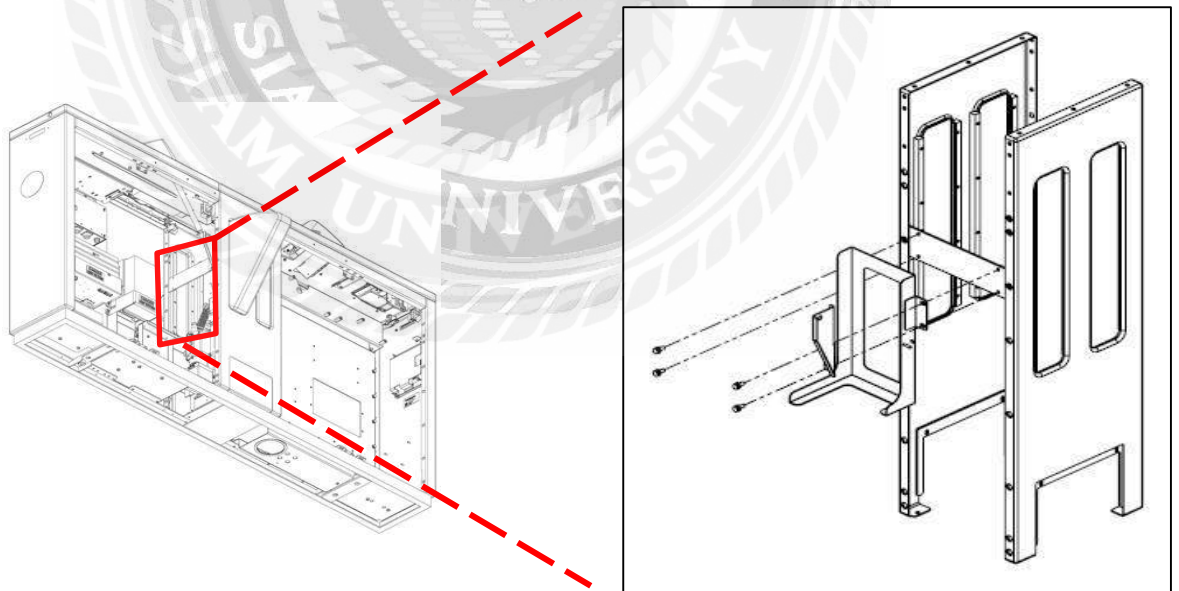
UPS Mounting Bracket and the Location to be Installed On
